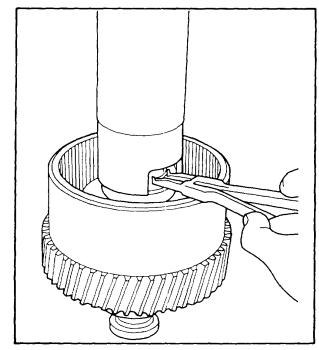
Removing or installing clutch release spring retaining snap ring.
